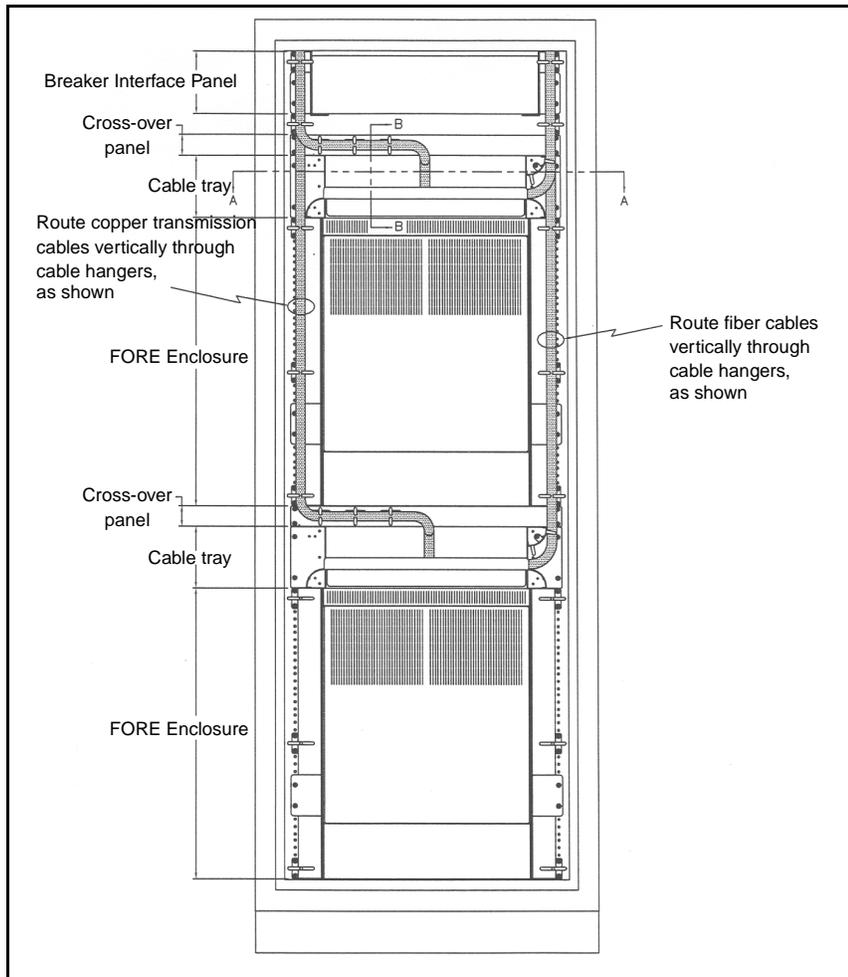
Rear View of FORE Kiosk with Cable Management
